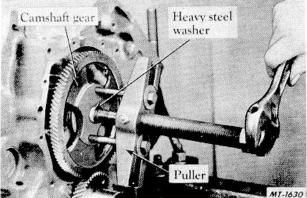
Use of SE- 1368 Puller and Heavy Steel Washer for Removing Camshaft Gear
